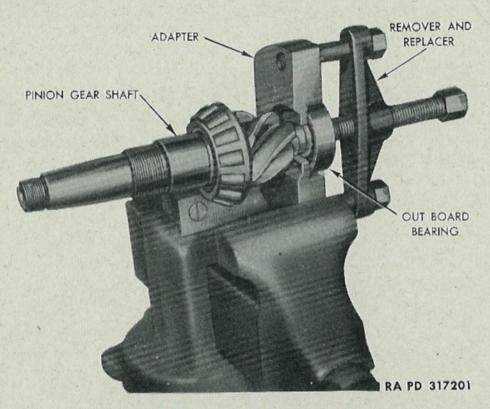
Removing Outboard Bearing from Pinion Gear Shaft with Remover and Replacer 41-R-2385-135 and Adapters M8-122A
